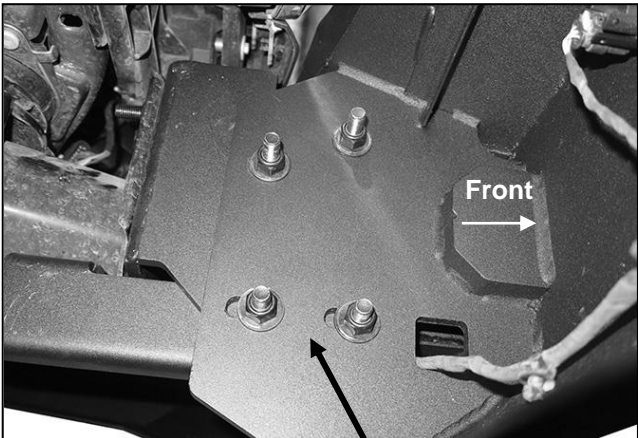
Attach Driver/left side of Bumper to inside of Frame Bracket and Support Bracket
